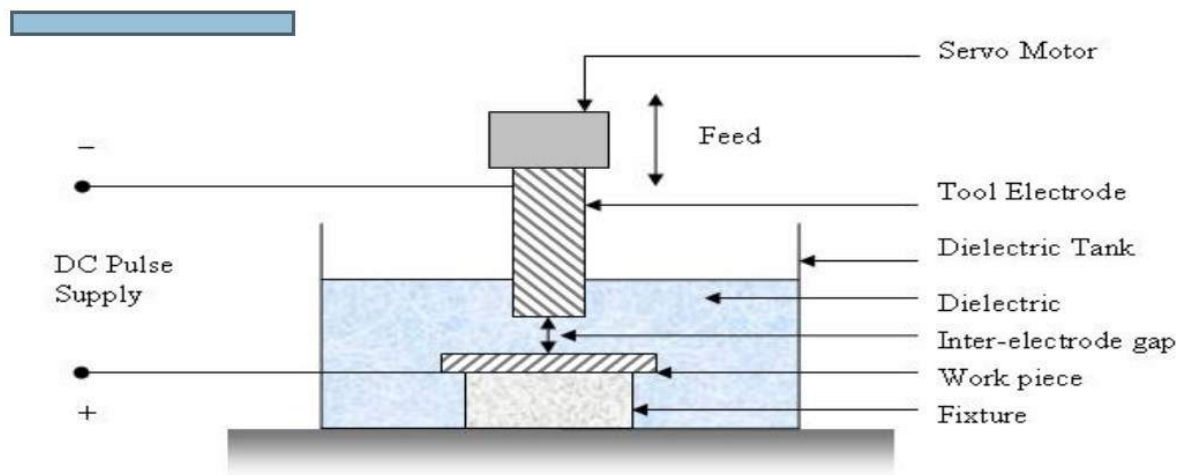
Schematic of an Electric Discharge Machining (EDM) machine tool.
